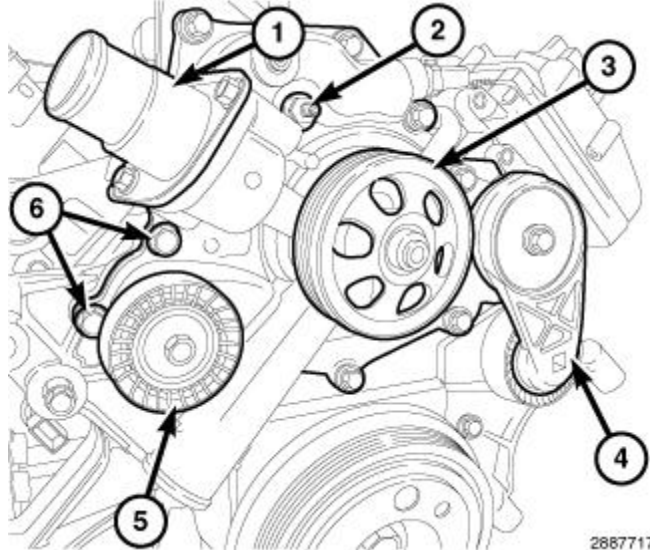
Thermostat Housing, Water Pump, Belt Tensioner, & Idler Pulley
